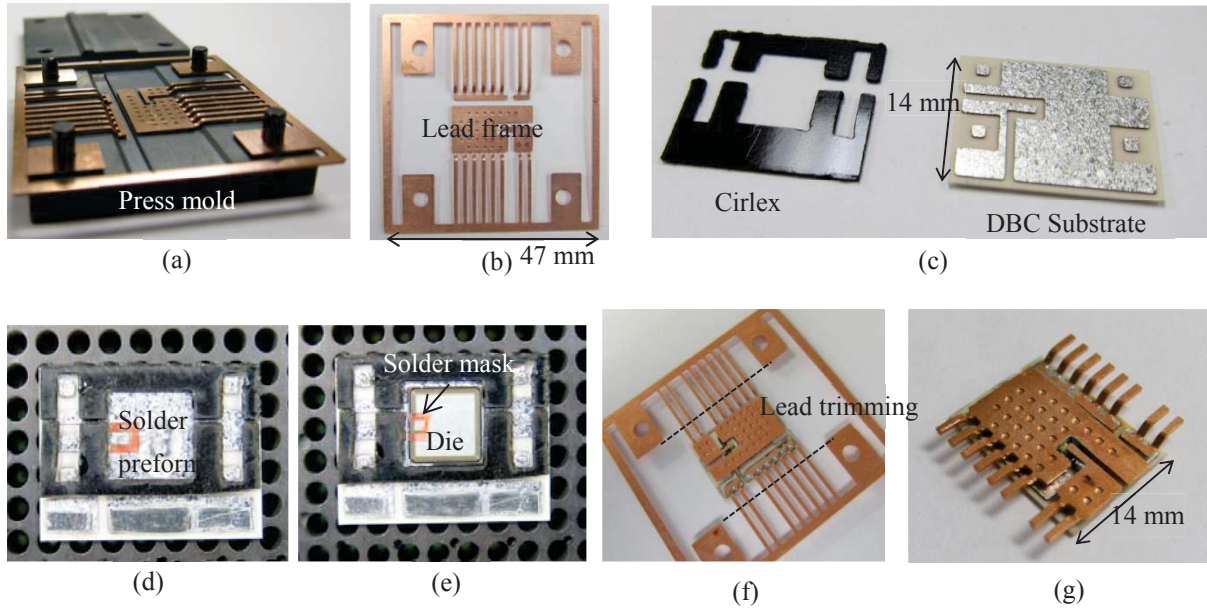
Packaging process of the single chip module using components in Figure 5-5: (a)(b) lead frame shaping; (c) Cirlex fixture and DBC substrate; (d) place solder preform; (e) place die with mask; (f) after vacuum reflow process; and (g) lead frame trimming.
